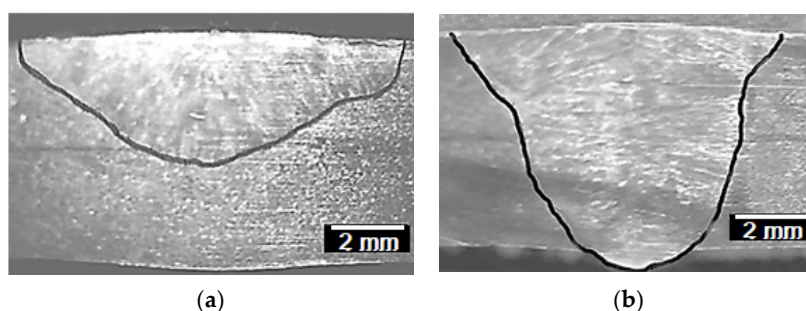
Morphology of TIG (a) and ATIG (b) welds.
